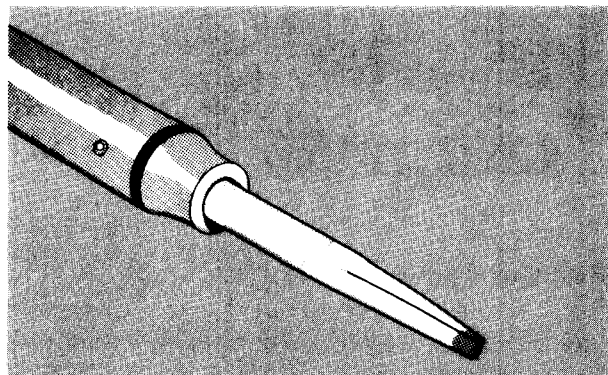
Soldering iron tip correctly shaped and tinned.
